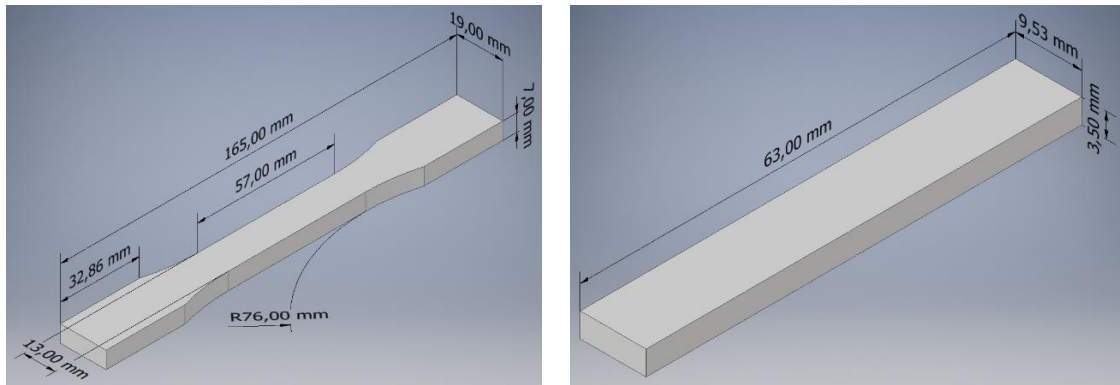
Test samples for the tensile test (left) and three-point bending test (right) produced by FDM 3D printer
